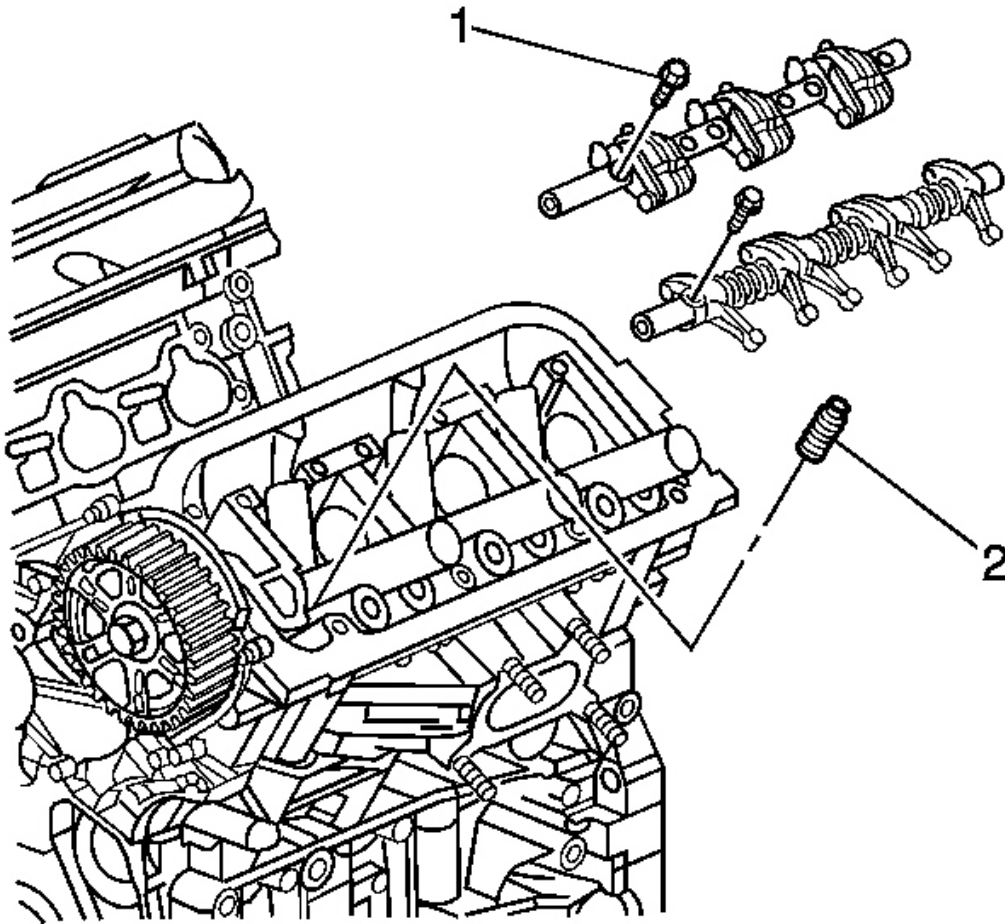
View Of Bolts, Valve Rocker Arm & Shaft Assemblies
